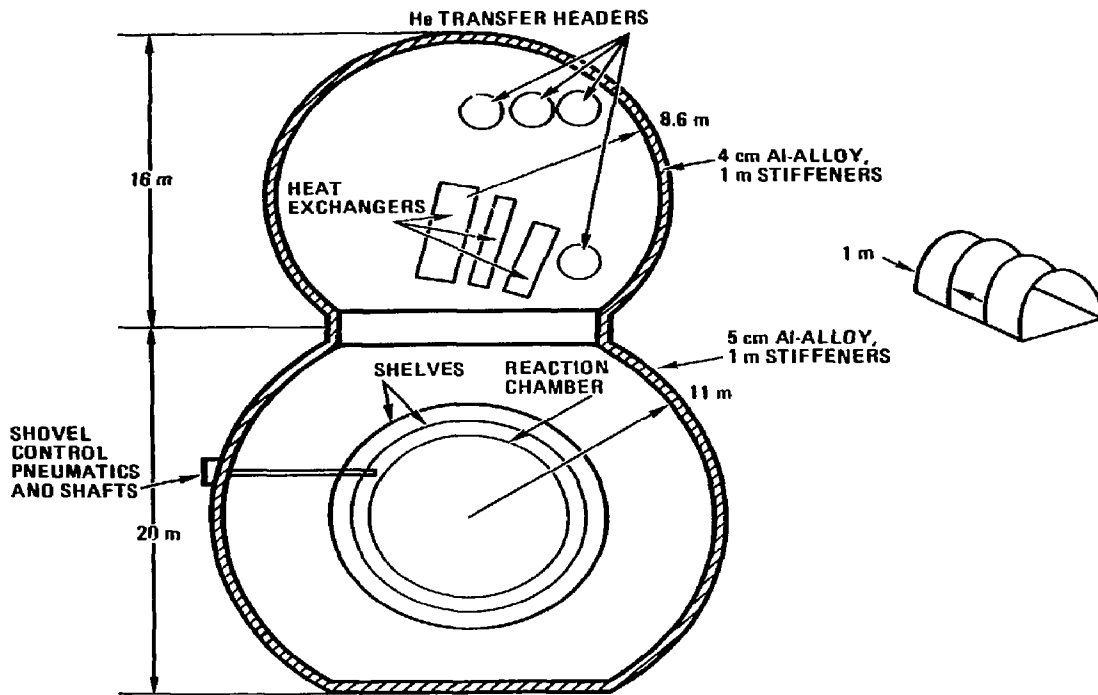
Vacuum chamber arrangement, end view, Sheet 2.
